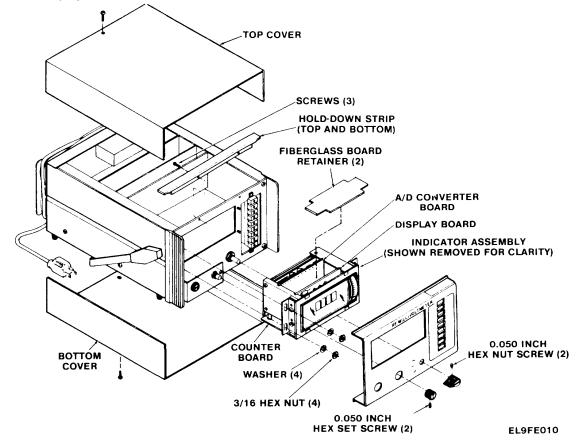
Exploded View of ME-526A/USM Front Panel Assembly
